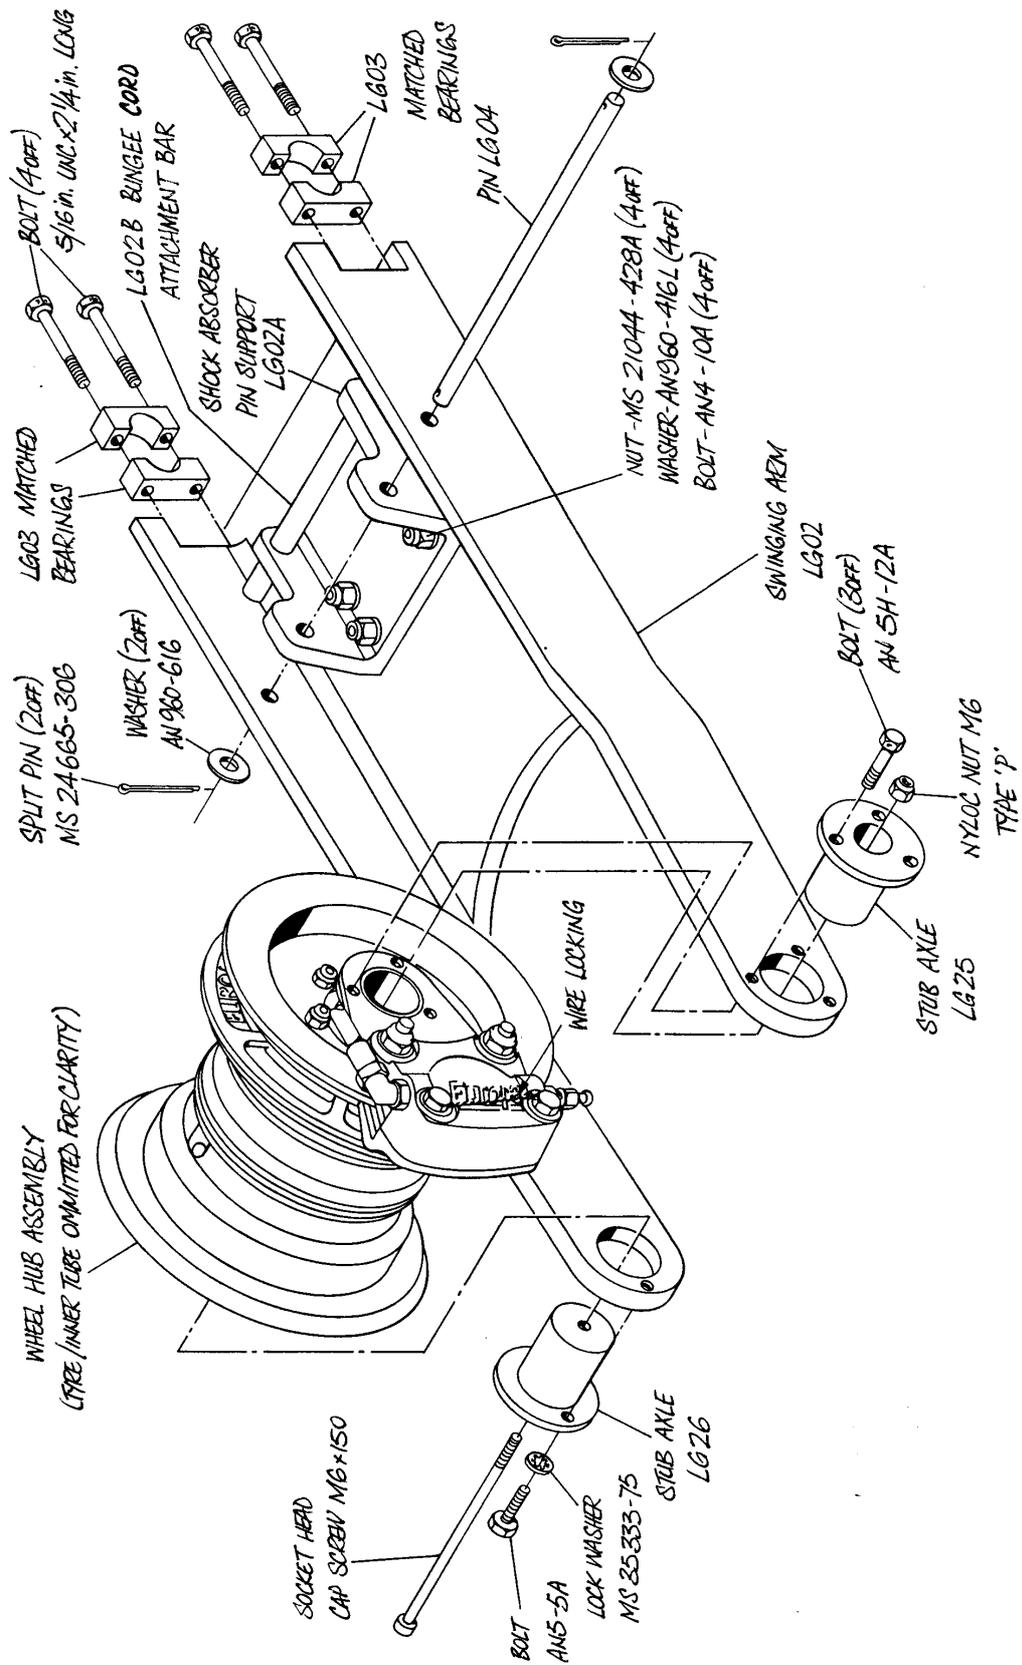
MAIN LANDING GEAR - WHEEL HUB ASSEMBLY
